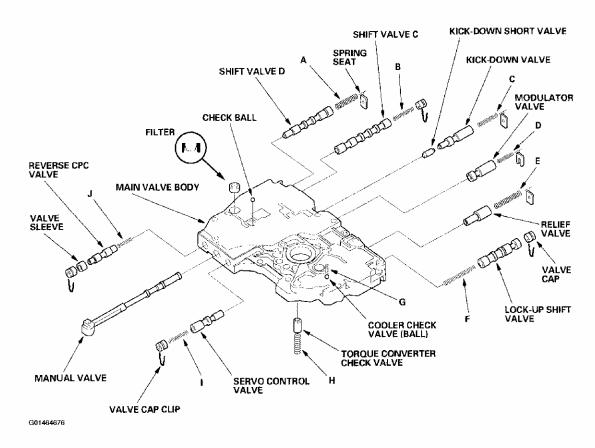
Exploded View Of Main Valve Body Courtesy of AMERICAN HONDA MOTOR CO., INC.
